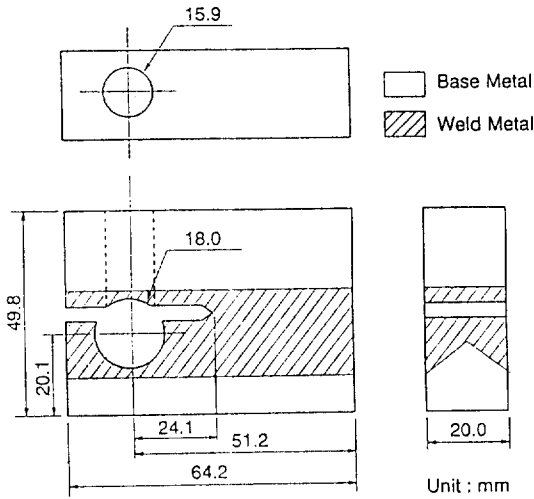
Schematic showing the modified WOL specimen with typical dimensions.
